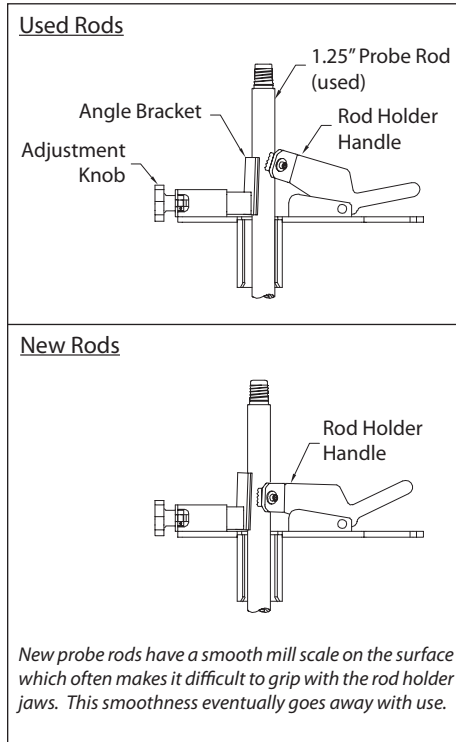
Adjust the handle angle to provide maximum grip at the holder jaws.
